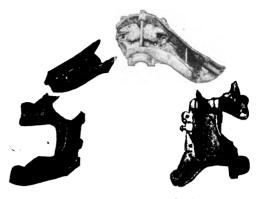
Broken Aluminum Casting Courtesy of Davis-Bournonville Company
